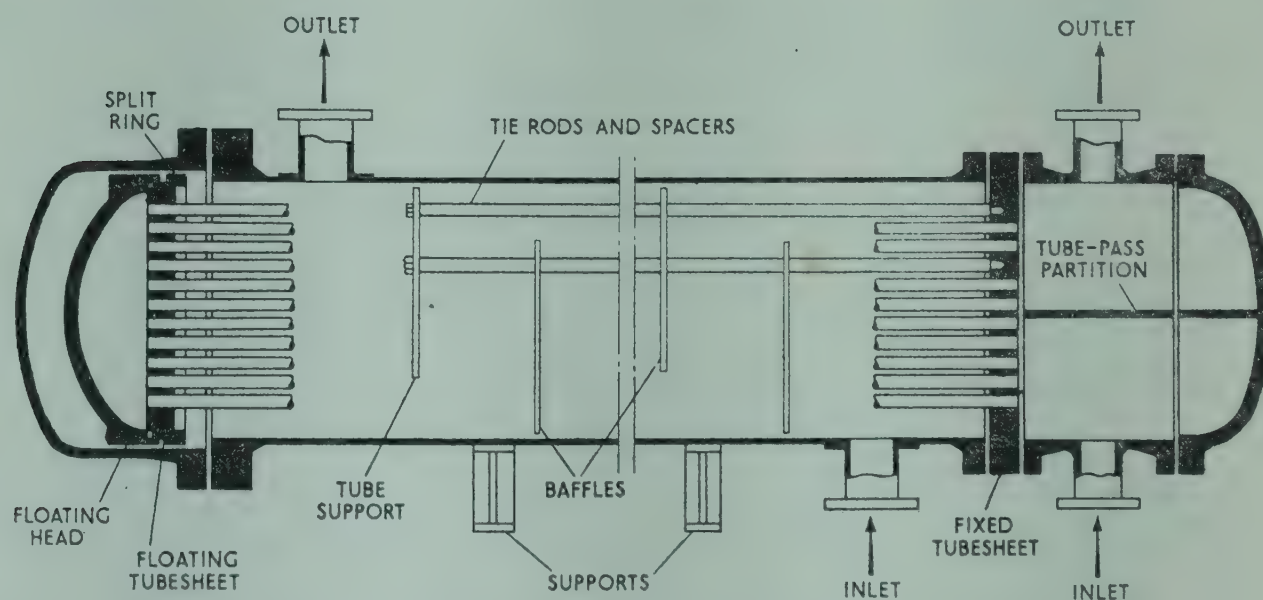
Heat exchanger with floating head (2 tube pass 1 shell pass)
